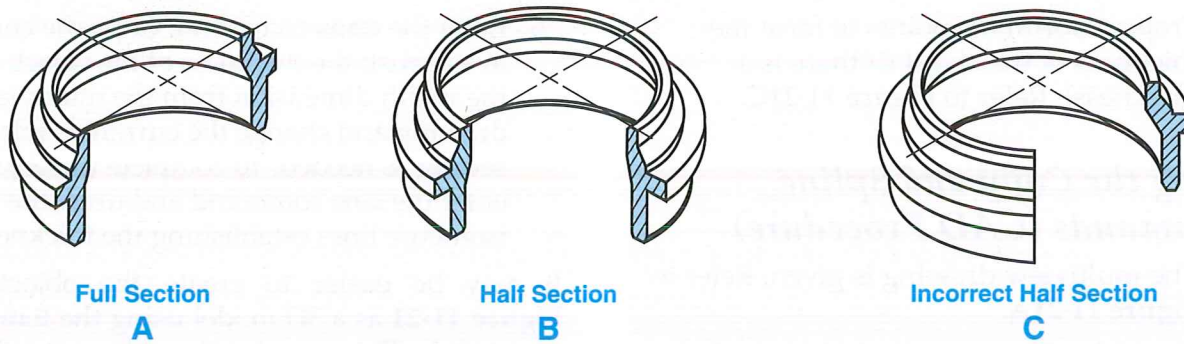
Isometric section views. A—For full section views, the cutting plane should be parallel to one of the isometric axes. B—The cutting planes for isometric half section views should be parallel to the isometric axes. C—The cutting planes for isometric half section views should *not* be parallel to the edges of the drawing sheet.
